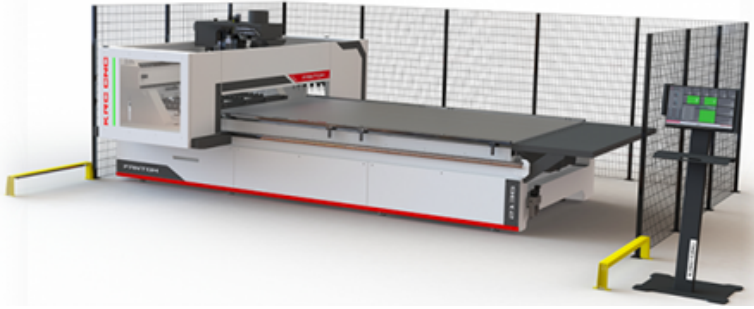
CNC Wooden Panel Machining Center (URL 3)
